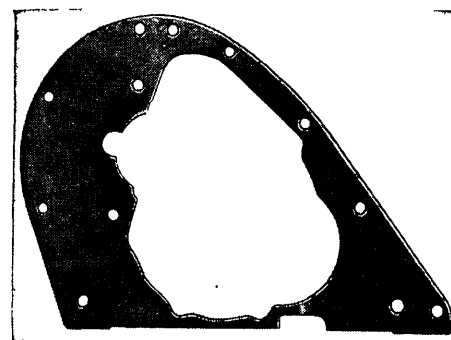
Front engine support plate showing camshaft thrust flange, 1941-50 L-Head
